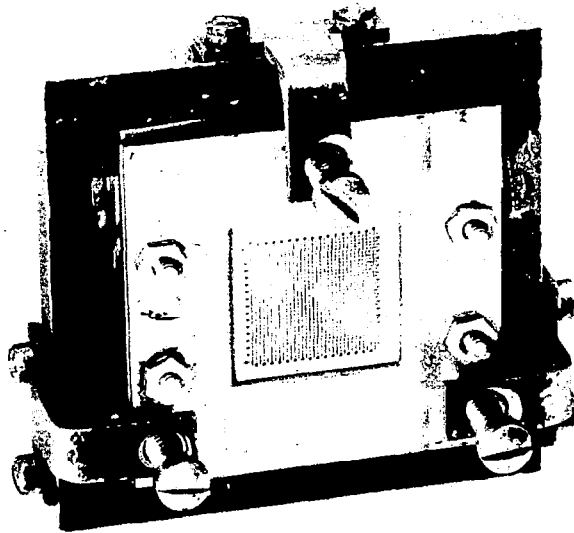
Wafer Holder, Wafer, and Mask Holder Clamped into One Rigid Assembly
